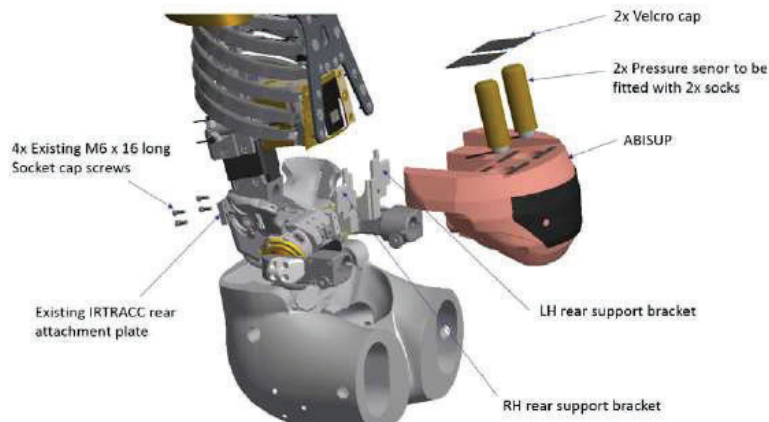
Exploded view of the lower abdomen ABISUP prototype and THOR-50M.
